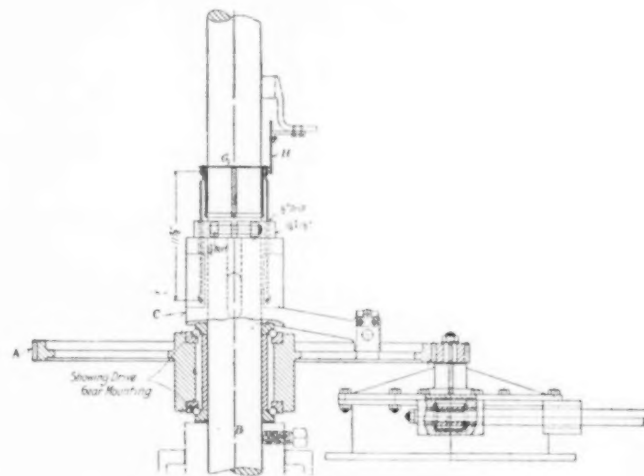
DETAILS OF DRIVE-GEAR MOUNTING OF TESTING MACHINE SHOWN IN FIG. 2
